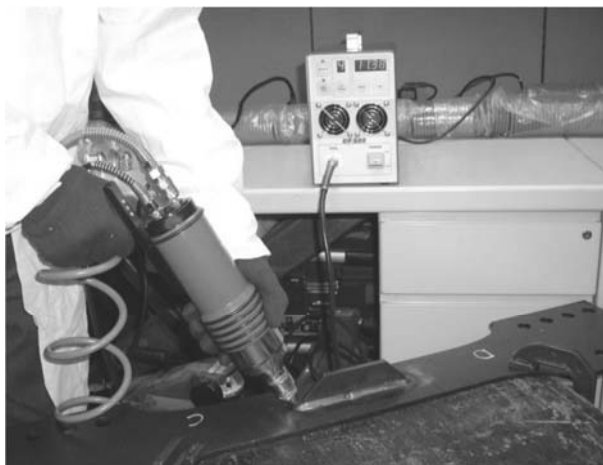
Ultrasonic impact treatment (UIT/UP) of welded sample for fatigue testing
